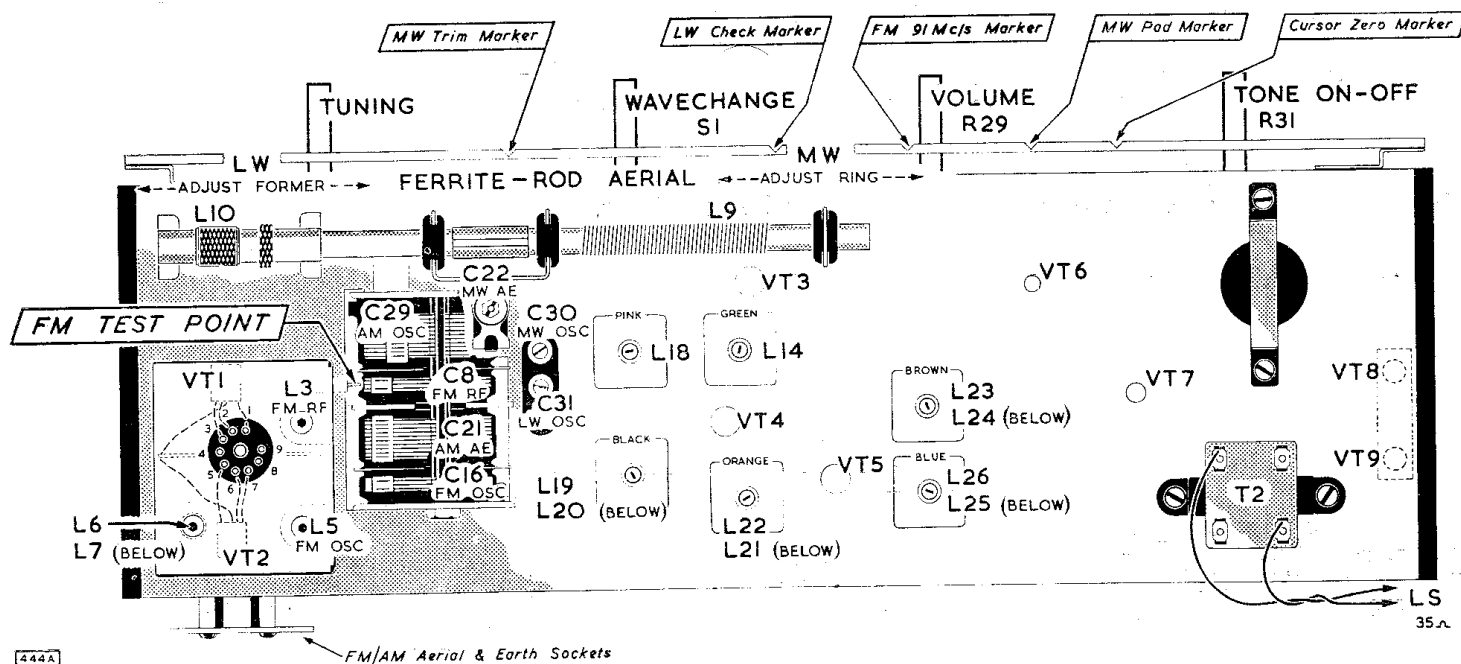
Top view of chassis showing location of trimming adjustments required for Alignment and VHF transistors test socket
